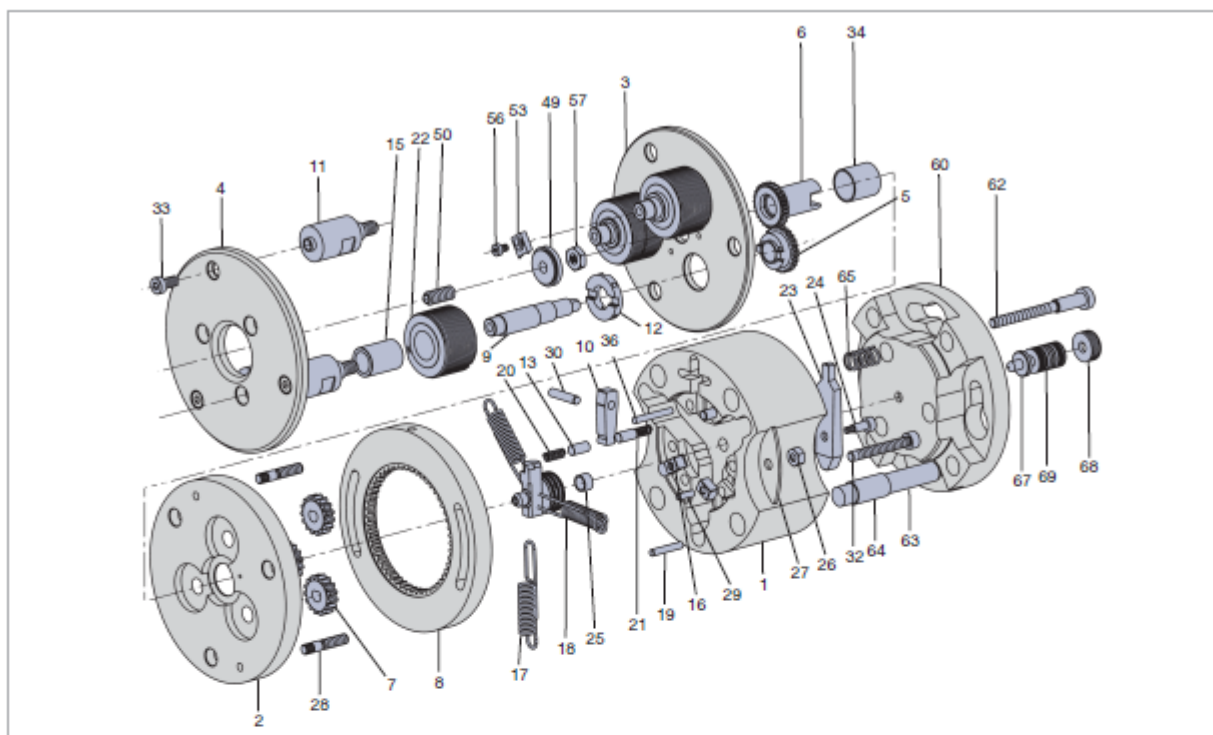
Exploded view, spare parts EW16A00 and EW16A01
